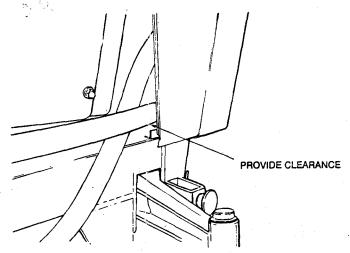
HOOD MODIFICATION FOR OIL LINE
